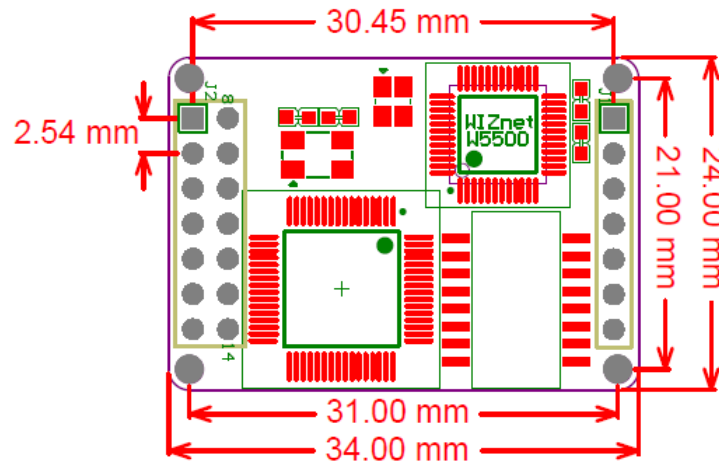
W5500S2E-S1 dimensions figures - Plan view
